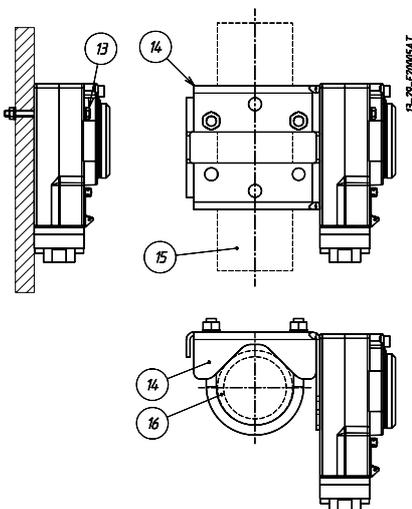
Surface or bracket mounting for 2" pipe (weatherproof and explosionproof instruments)
